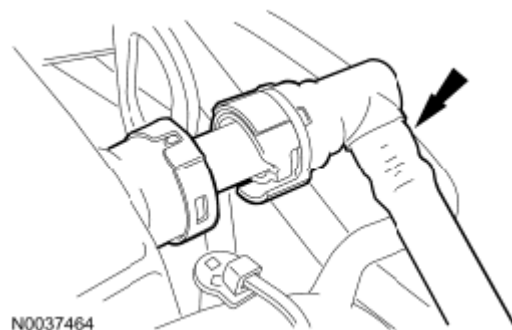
Connecting Crankcase Vent Tube To Valve Cover
